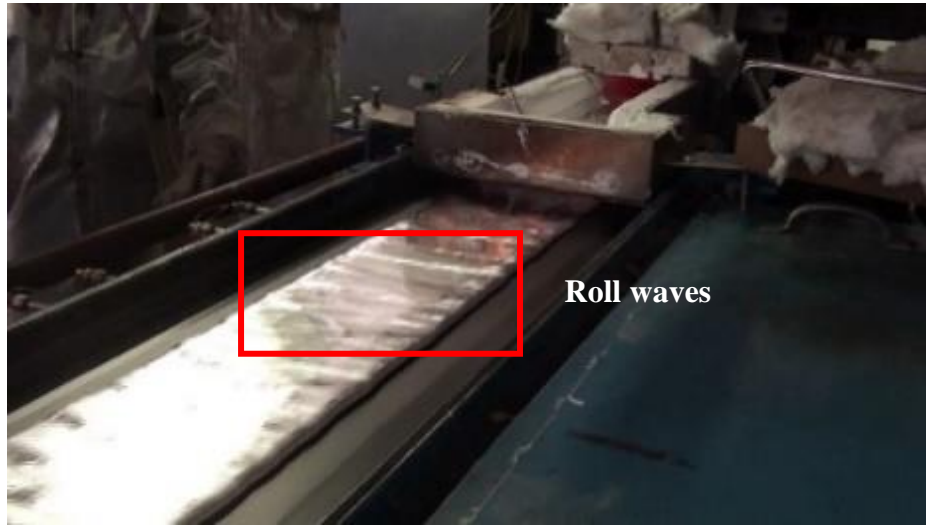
180 mm AA2024 strip during casting using the HSBC pilot-scale machine
